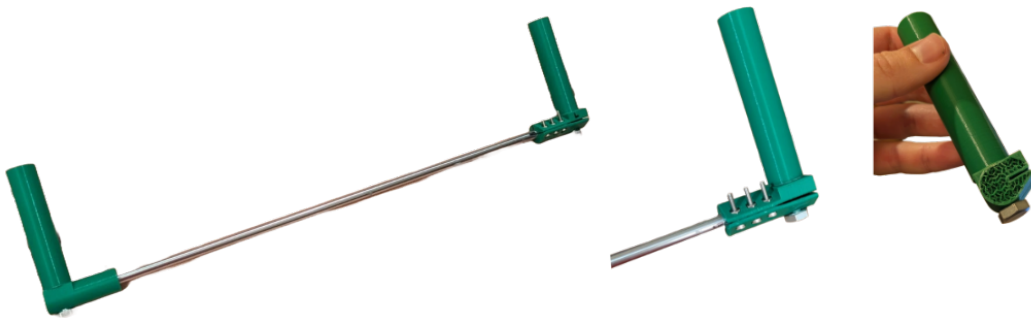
Iteration 1: torsion rod with 3D-printed clamp and handle. The clamp is tightened with M3 bolts and bonded with Loctite adhesive. The handle contains an embedded M8 bolt for bending stiffness. On the right the breakage is shown.
